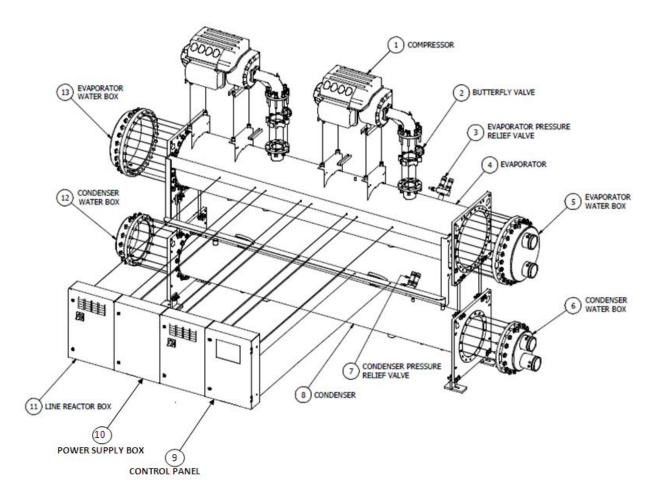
Exploded View - Water Cooled Chiller - Principal Components
